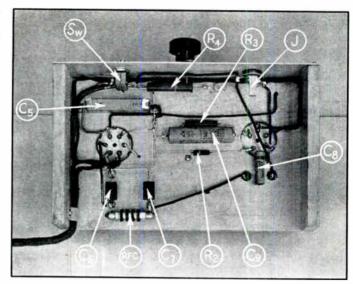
BOTTOM VIEW OF THE TWO-TUBE RECEIVER
